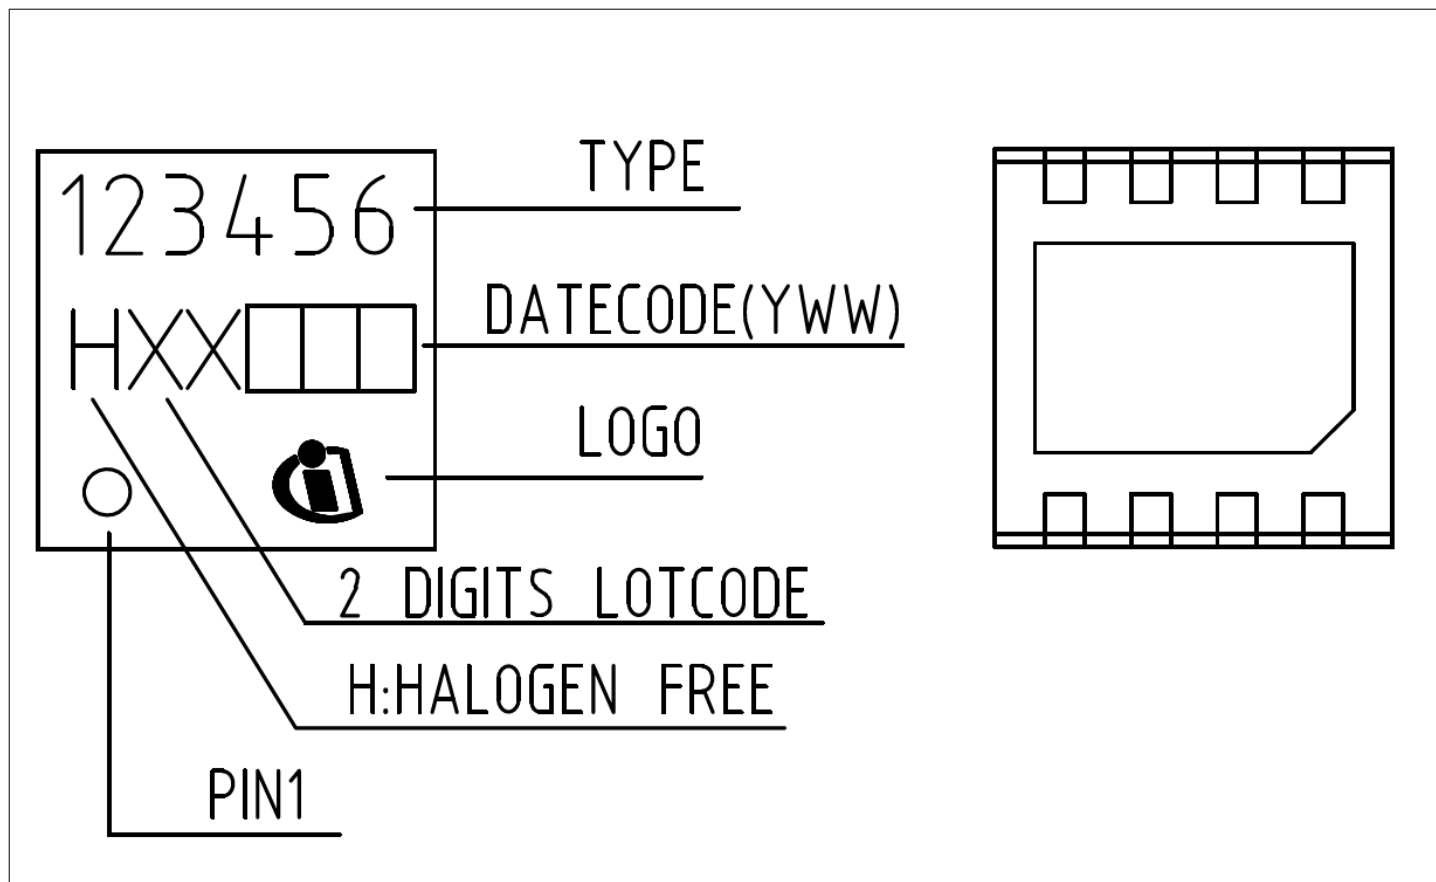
PG-VSON-8 package marking (left top side, right bottom side)
